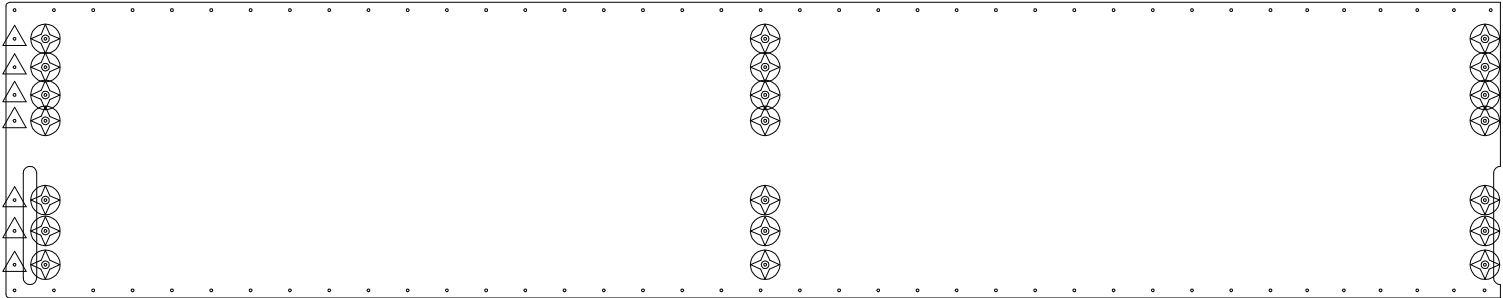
FL-1001B-L OUTBOARD NOSE SKIN RIVETS
